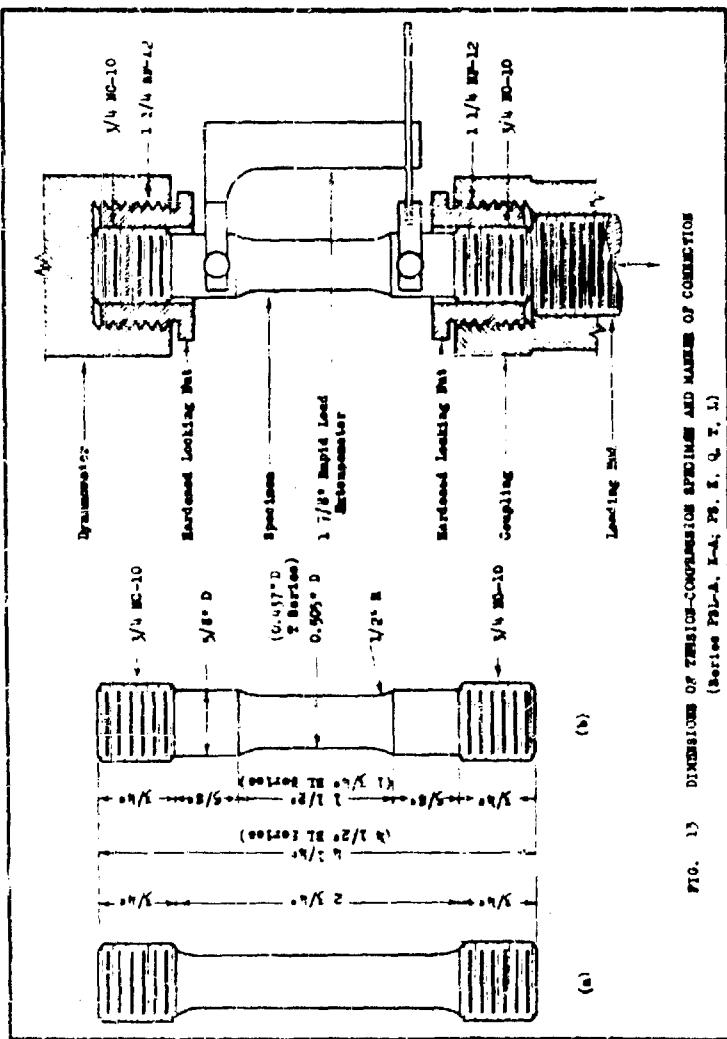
DIMENSIONS OF TENSION-COMPRESSION SPINDLE AND MANNER OF CONNECTION
